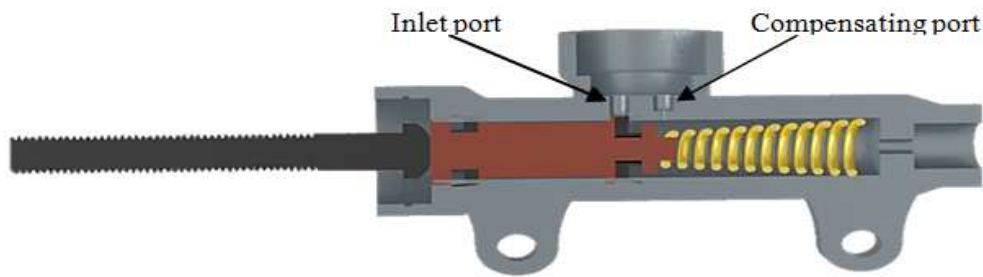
Brake Release Position of Master Cylinder Assembly (CAD Model-Sectional View).
